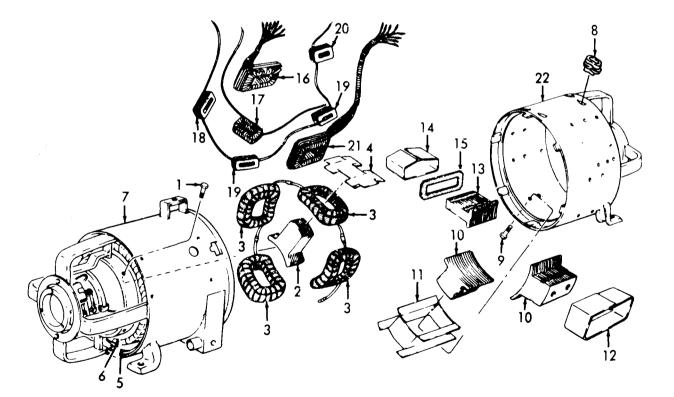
Dynamotor-Welder Frames, Field Coils, Pole Shoes, Brush Holders and Mounting Rings, Exploded View (Sheet 1 of 3).
